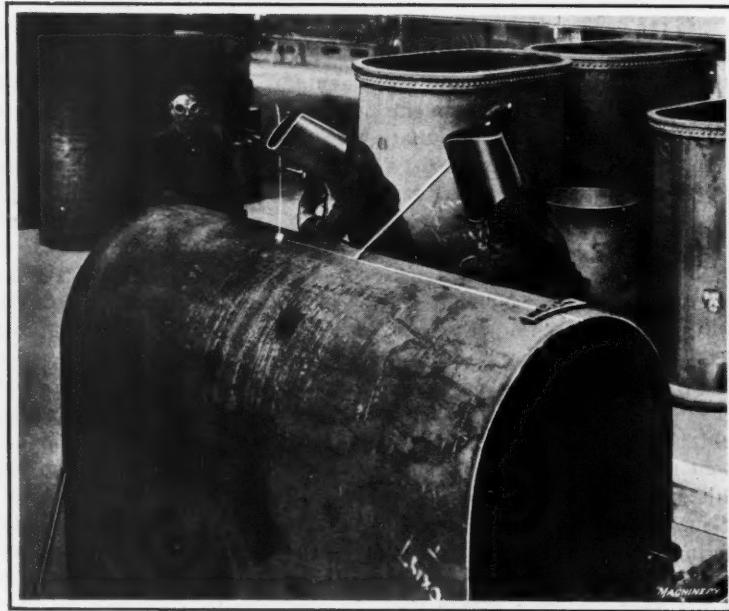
Welding of Seam in Transformer Tank, showing Method employed for maintaining Proper Space between Plates being welded
